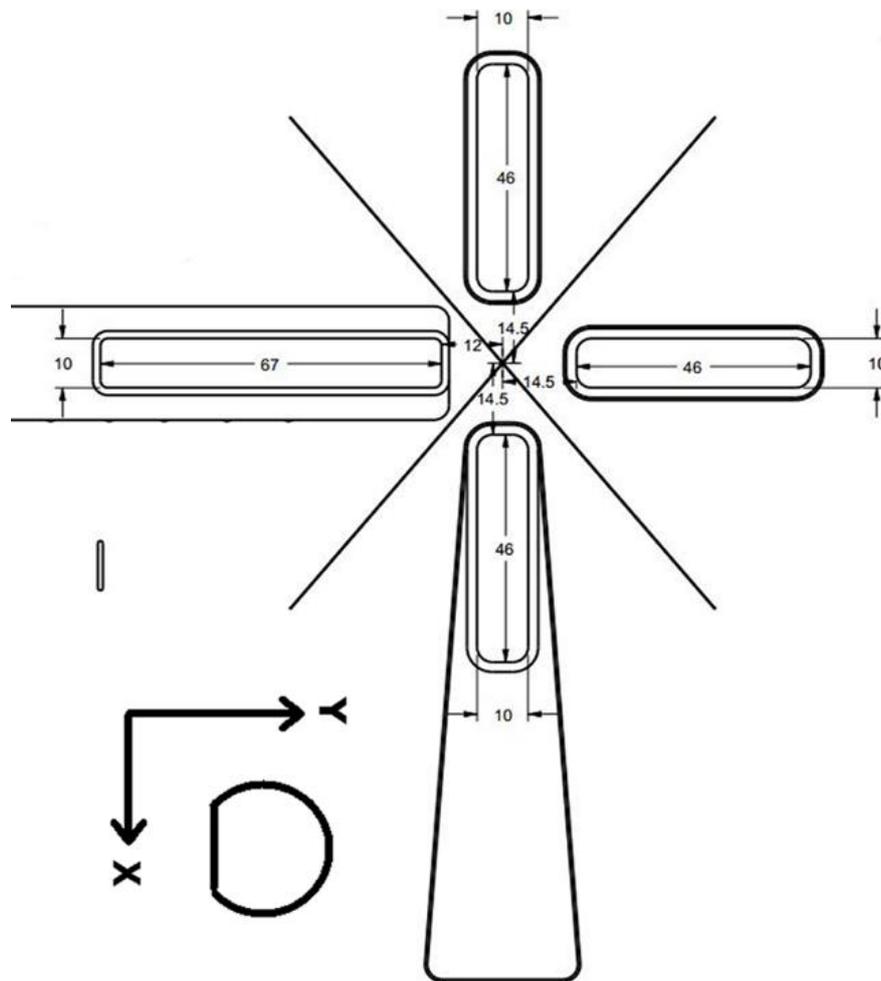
Chuck – Backside alignment zones (standard chuck layout)
